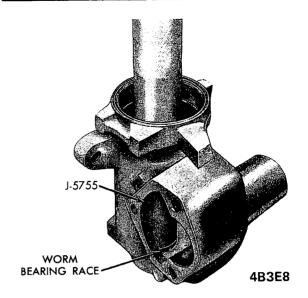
E-8 Installing Wormshaft Bearing Race in Housing
